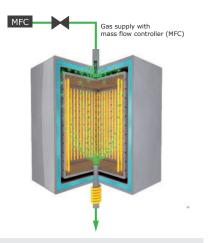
Schematic view into a cold wall chamber furnace HTK equipped with a retort, gas guidance system and heated gas outlet leading to the afterburner
